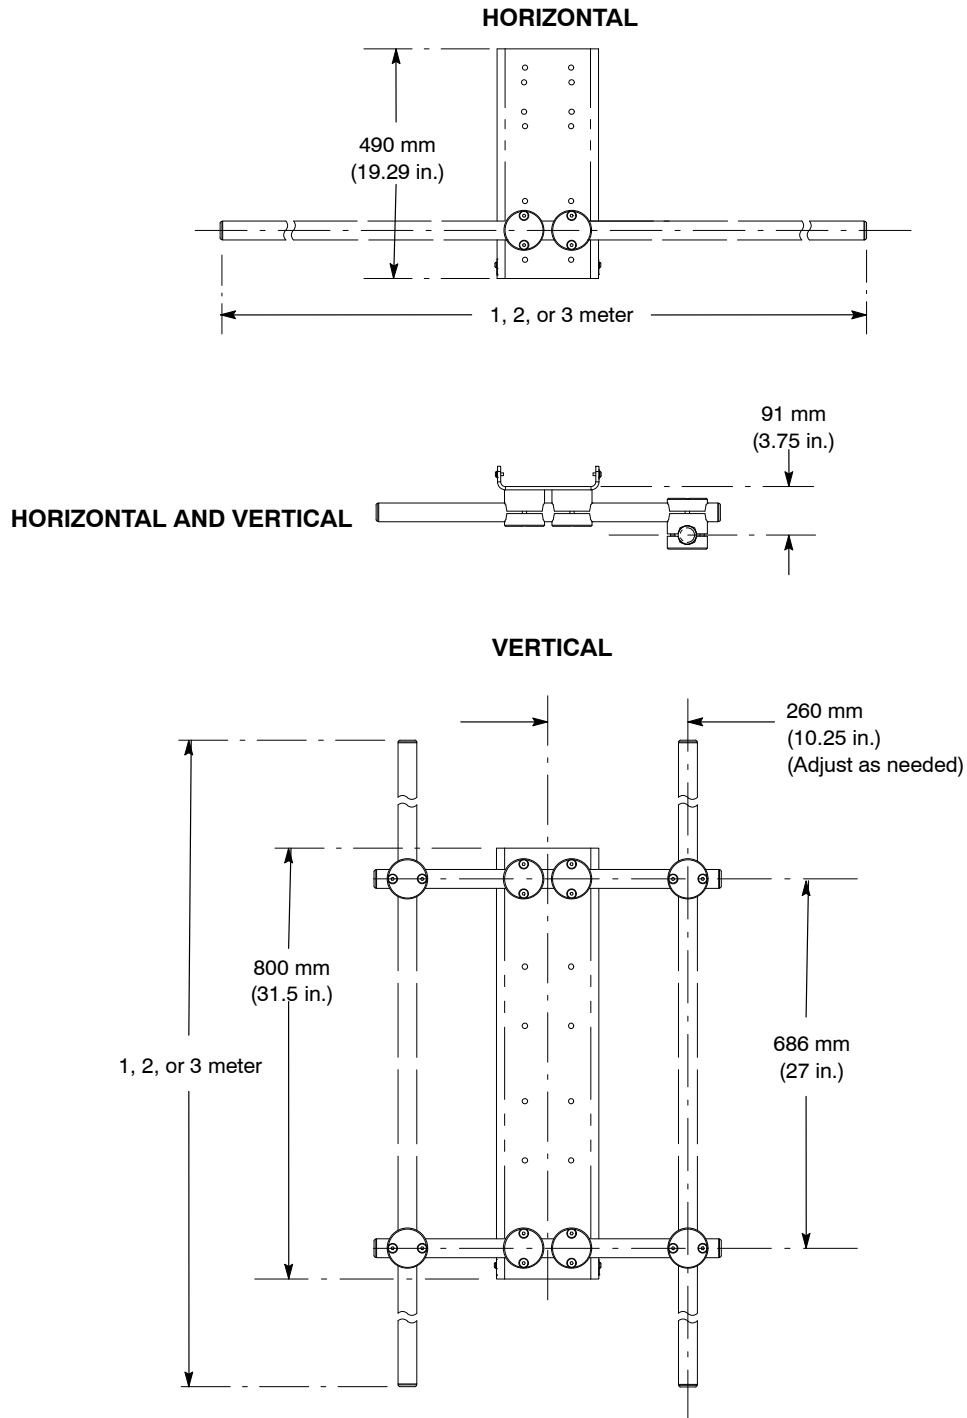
Single Horizontal and Vertical Gun Support Dimensions
